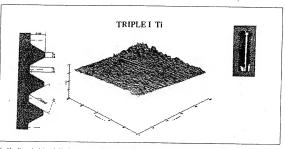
31 standard threaded implant, a commercially pure obtainium screw with a slightly rounded thread bottom and with a truncated thread top. A smooth surface but the roughest of the three commercially pure obtainium screws, with the same direction of the surface pattern as the Screw-Wort, 31 Moniplant, and the other commercially pure informs screws.
